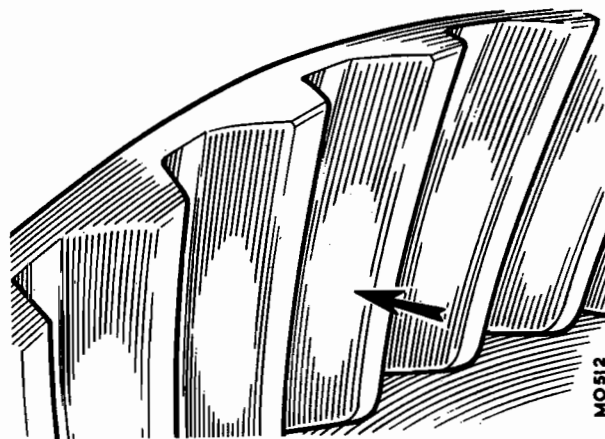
CORRECT TOOTH CONTACT IMPRESSION
